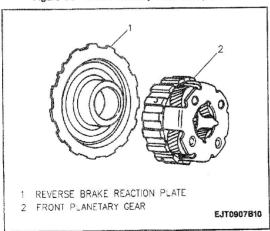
Reverse Brake Reaction Plate and Front Planetary Gear
